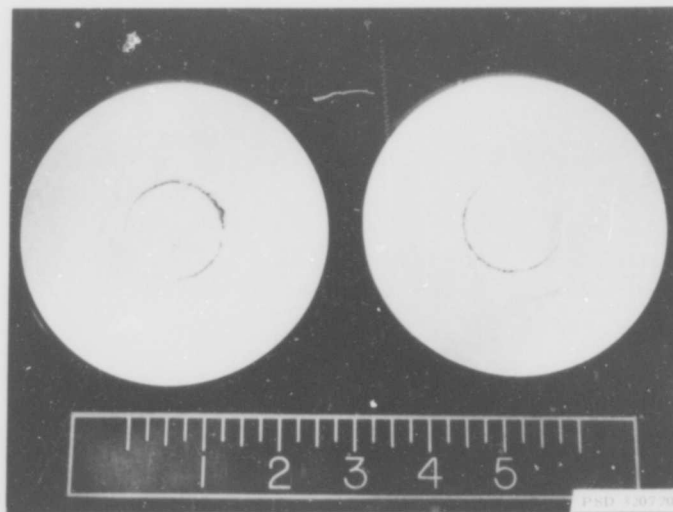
Surface of Hardened Steel Bearing Blocks after Test
